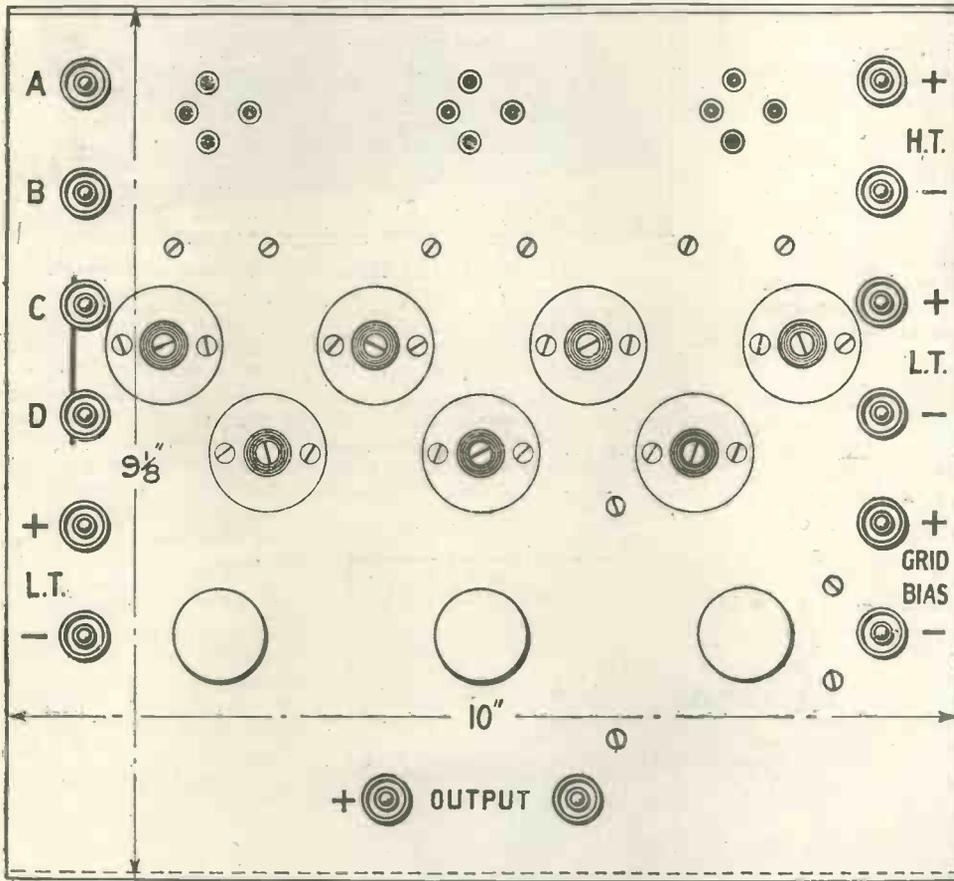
Panel layout and terminal markings. This illustration is exact!y half scale.
